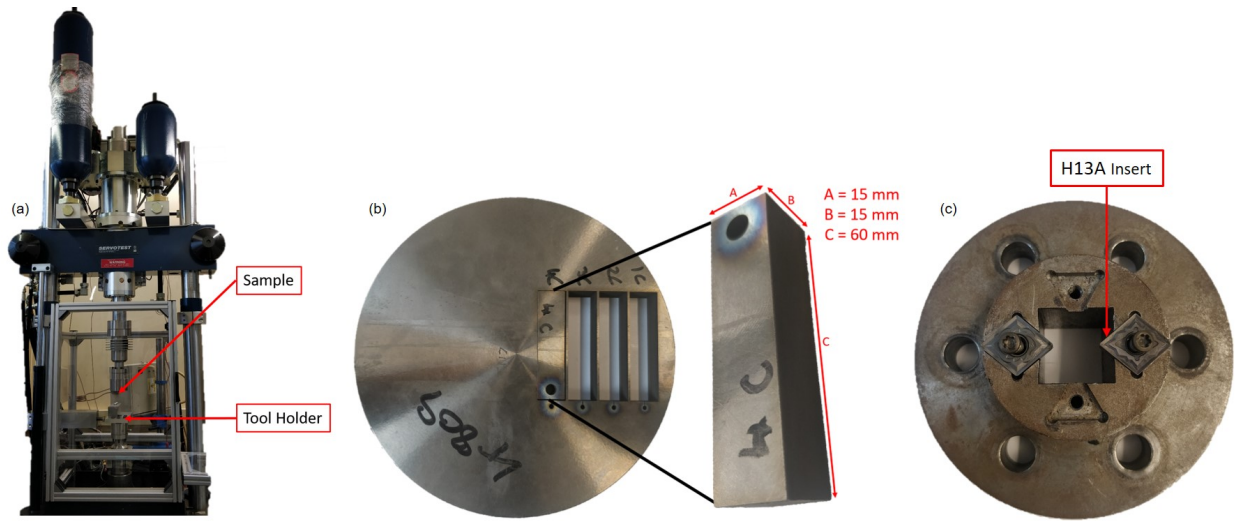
Photographs of the: (a) - ASP machine. (b) - Ti-17 material showing location of extraction with wire EDM and ASP sample dimensions. (c) - Tool holder and H13A inserts.
